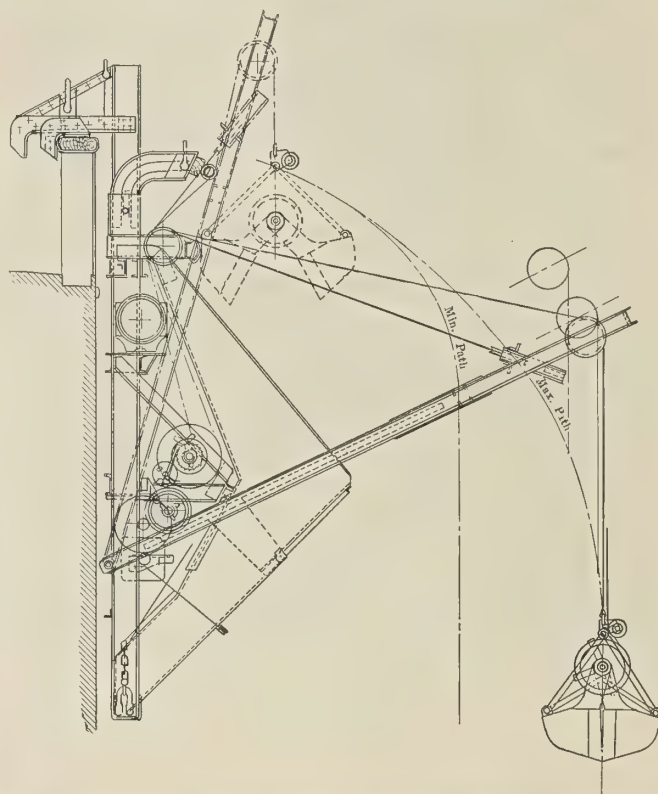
Details of Coaling Equipment, Showing Method of Operation
